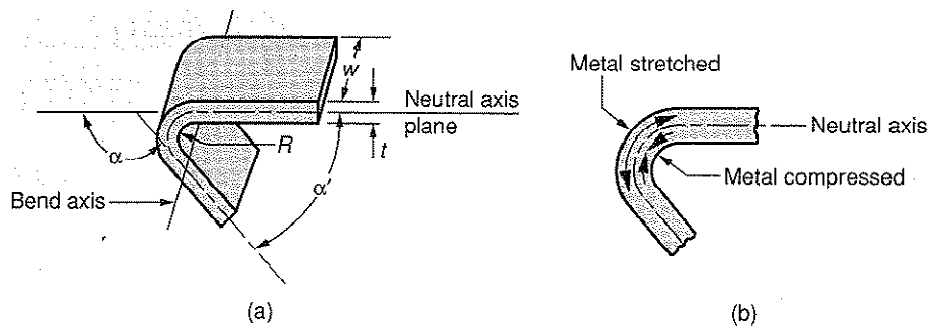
(a) Sheet metal bending, and (b) compression and tensile elongation during bending.
